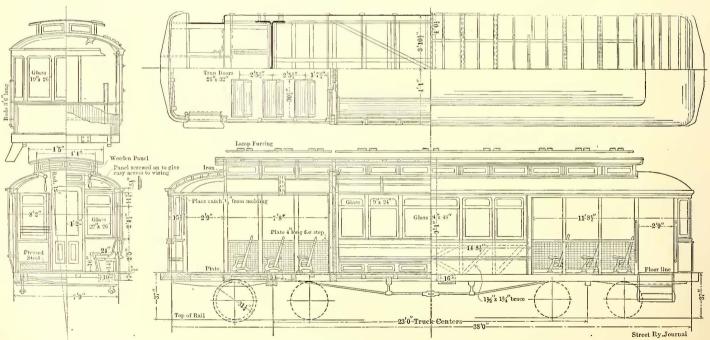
PLAN AND CROSS-SECTION OF CAR
